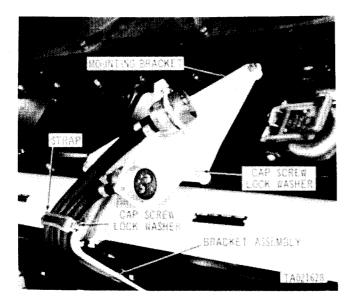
Removing or installing starter cable mounting bracket, early engines.
